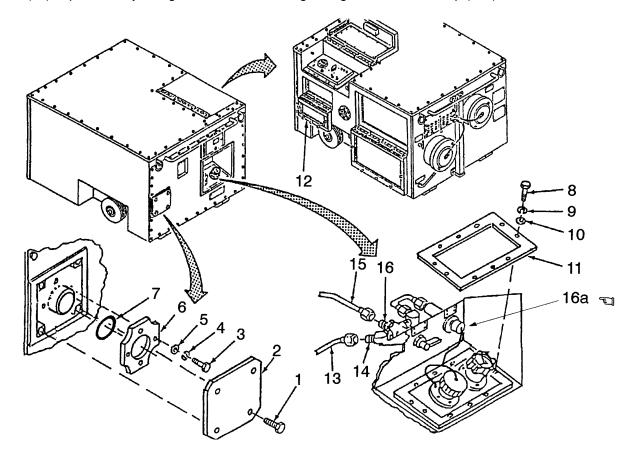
Rear Panel Assembly Removal (Sheet 1 of 2)
